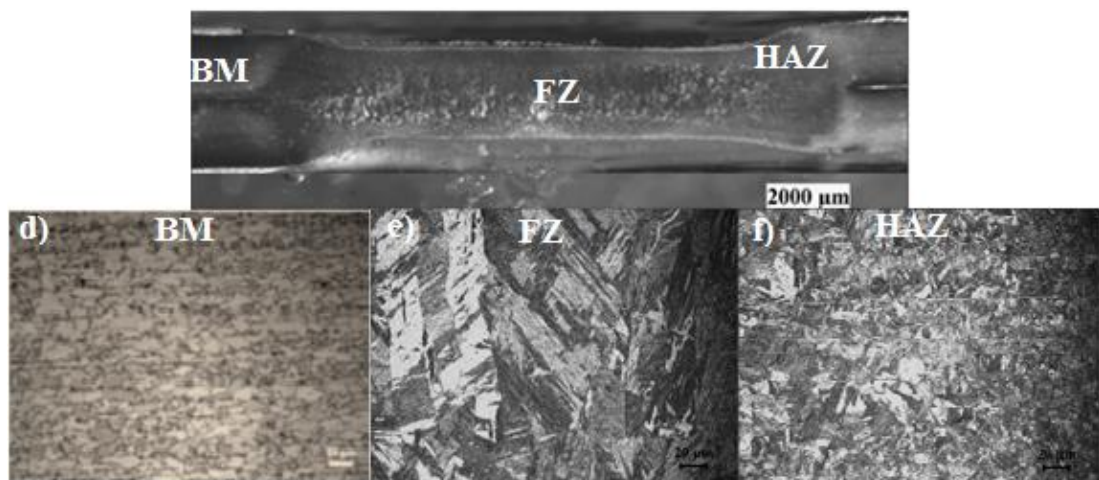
The weld zone profile and its microstructures of DP600 weldment joined with 5.5 Bar electrode force with 6kA welding current. d) DP600 base metal (BM), e) DP600 Heat Affect Zone (HAZ), f) DP600 weld nugget (FZ).
